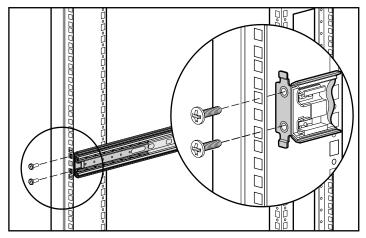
Attaching mounting bracket assembly to the front of the rack
